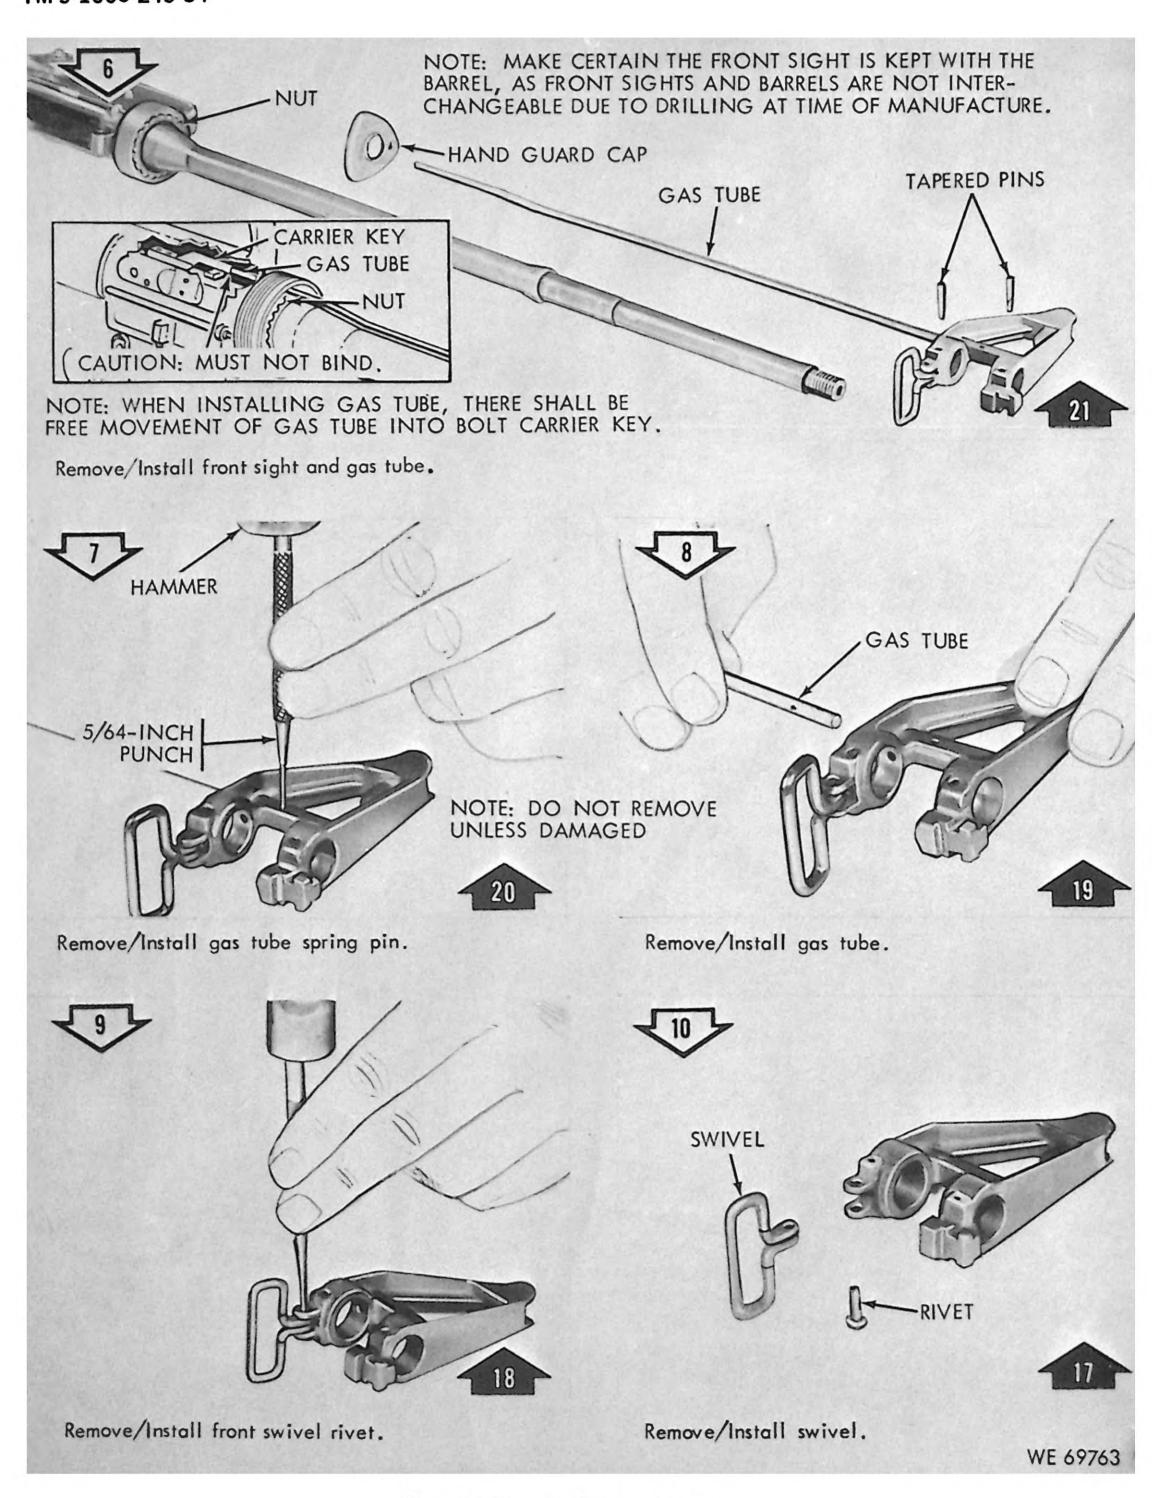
Disassembly/assembly of upper receiver group. (2 of 6)
